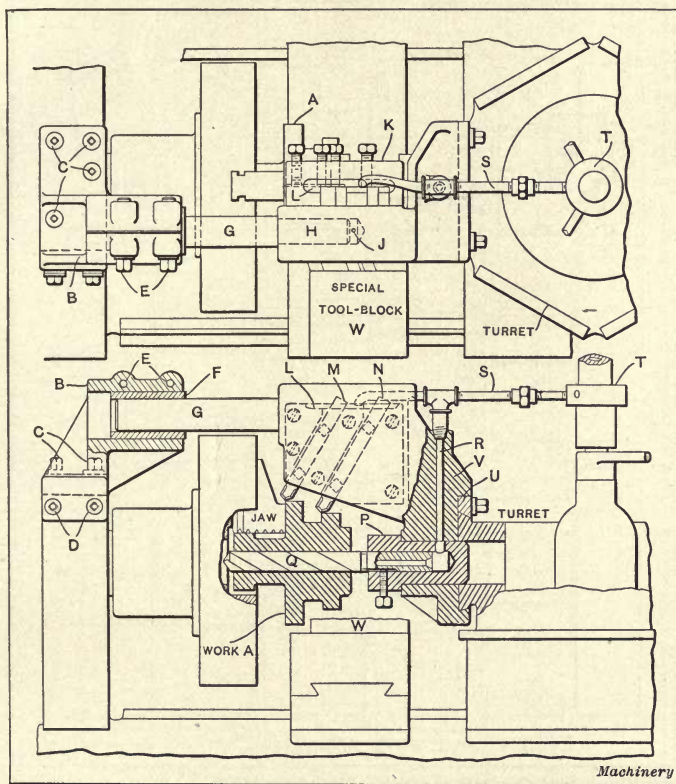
Piloted Multiple Turning Tool for Gear Blanks
